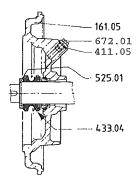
U3.9D, U3.12D - Unbalanced mechanical seal
